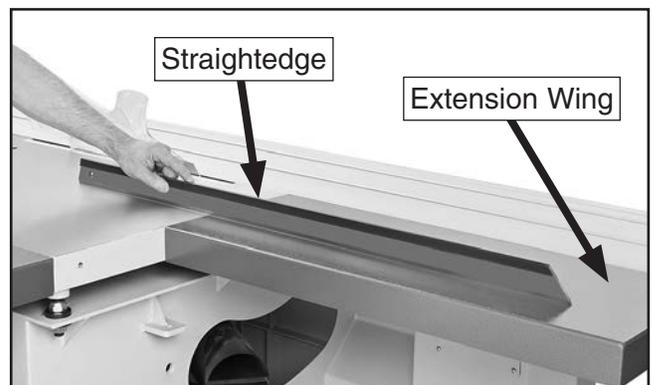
Using a straightedge to make sure the table/wing top surfaces are even.
